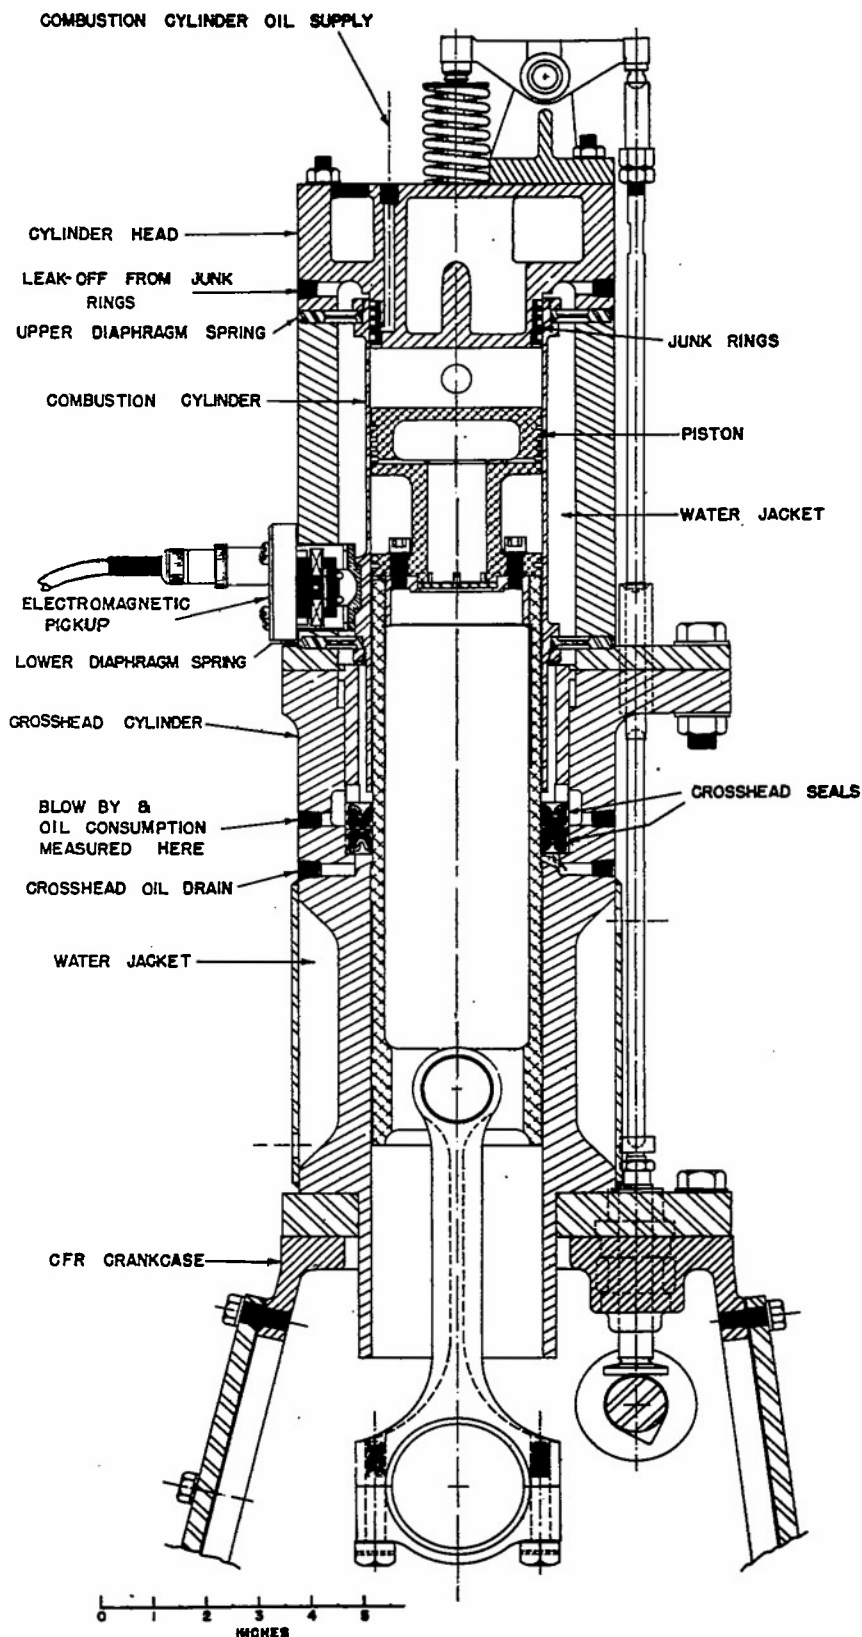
Engine, shewing crosshead and spring-mounted combustion cylinder.
